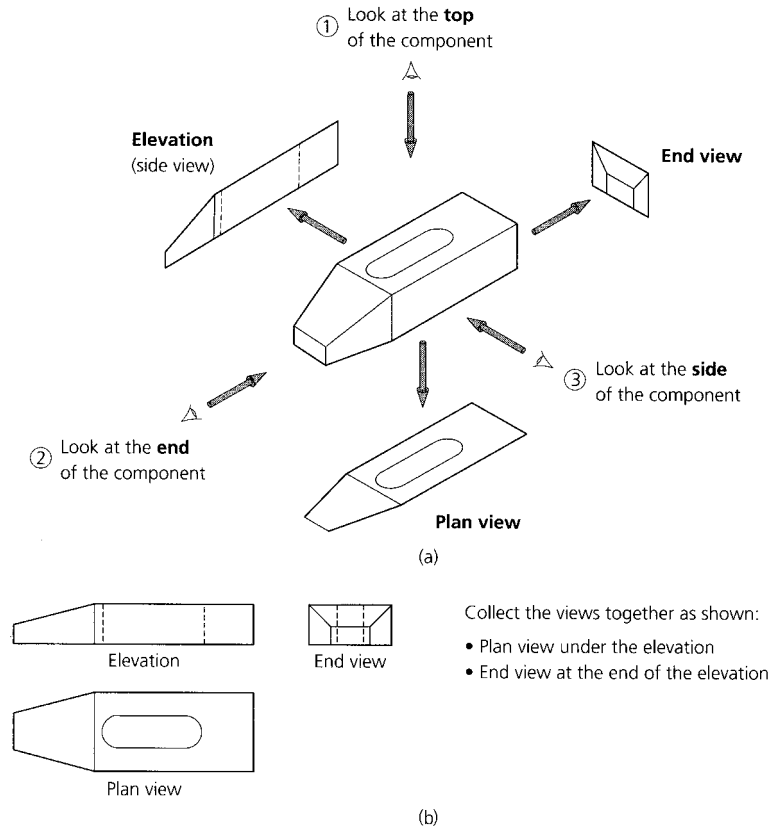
Principles of drawing in first angle projection: (a) plan view, end view, and elevation (side view); (b) collected views together make up an orthographic drawing
